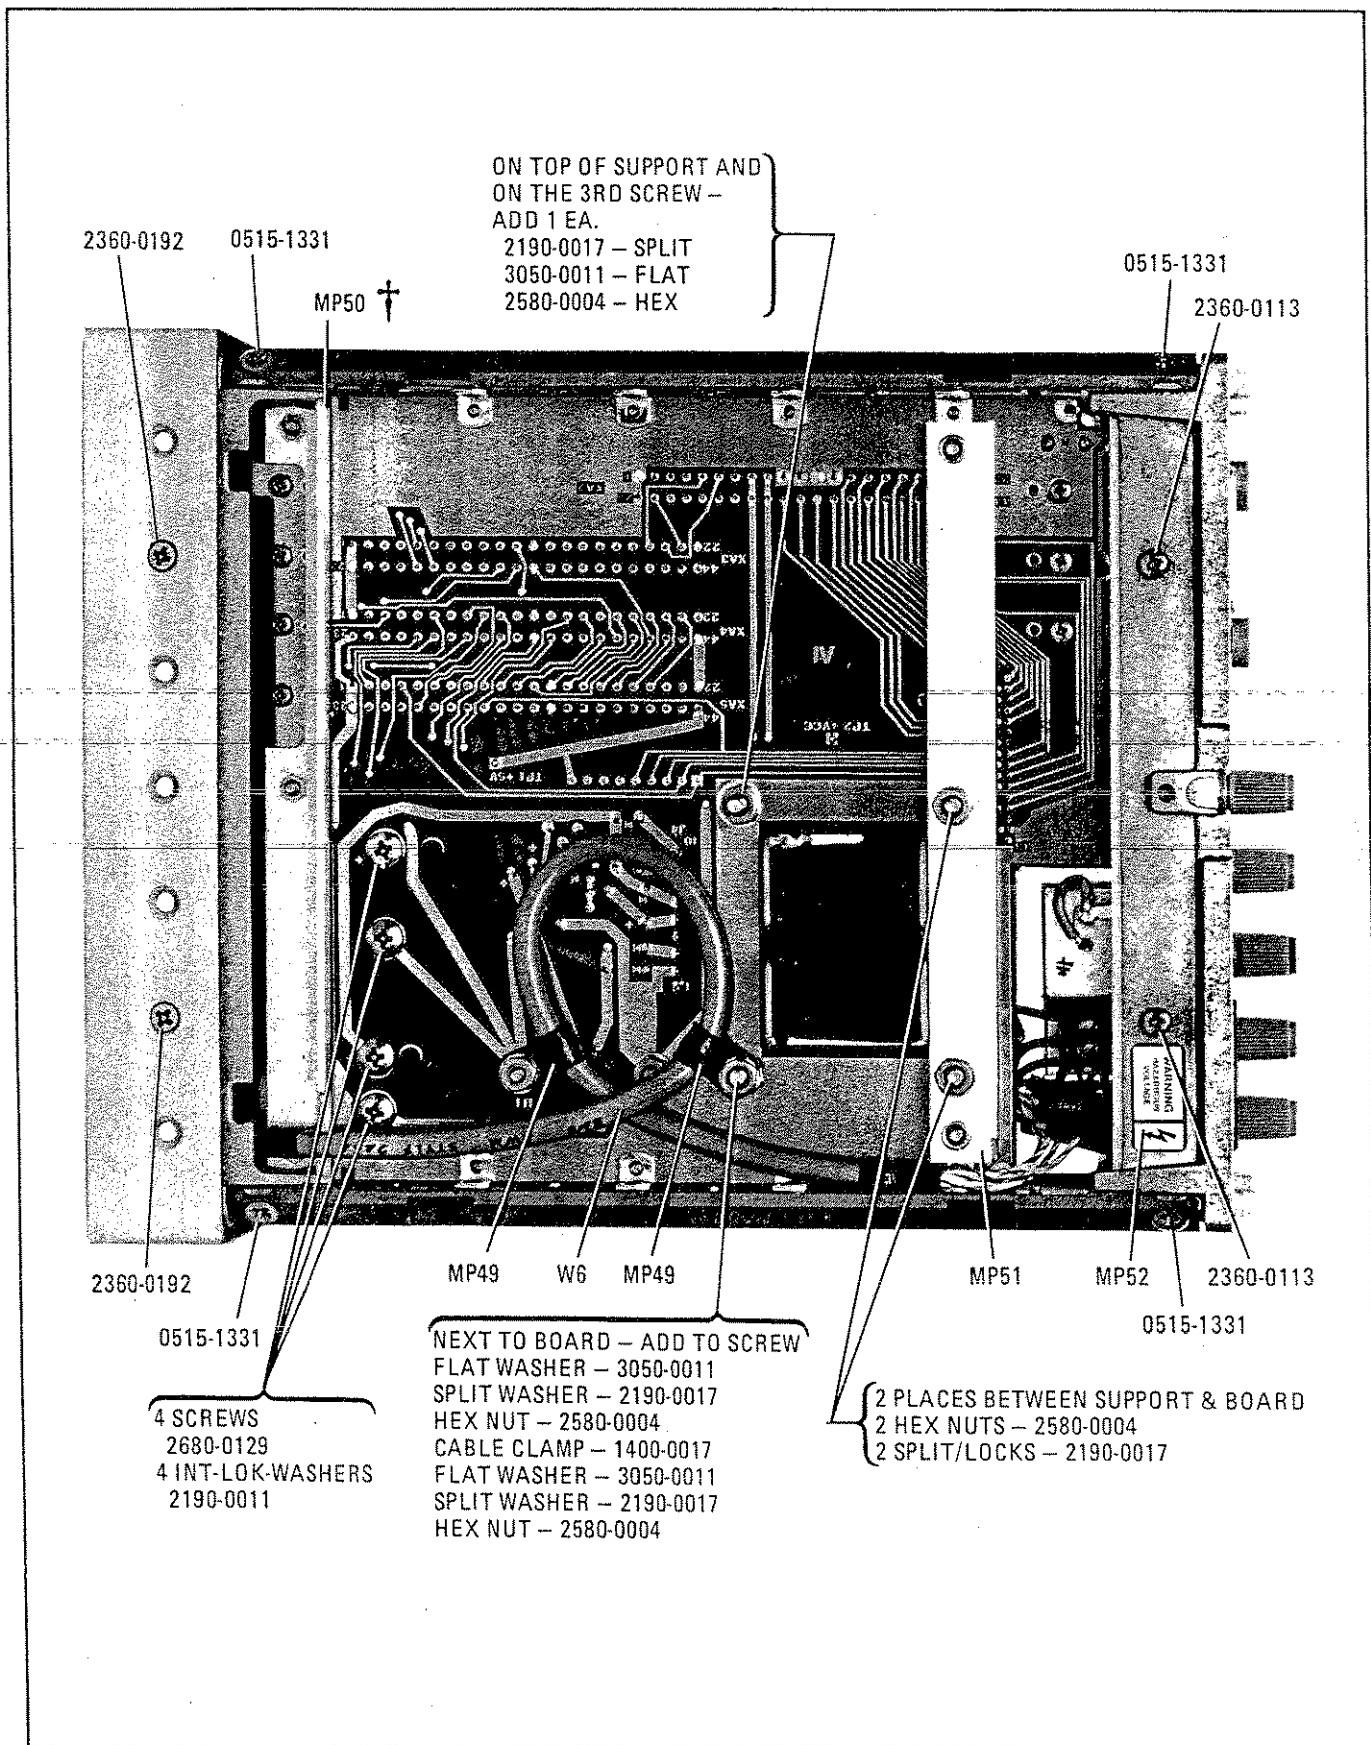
Bottom Internal Mechanical Parts and Hardware
